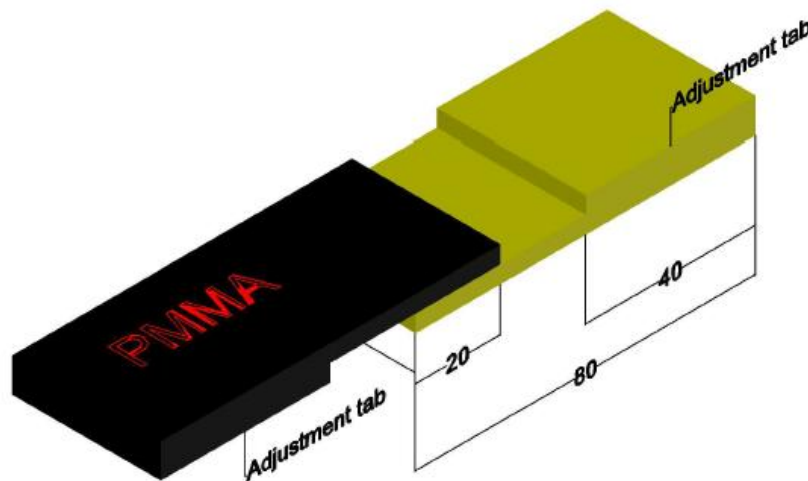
Design of welded sample for lap-shear testing
